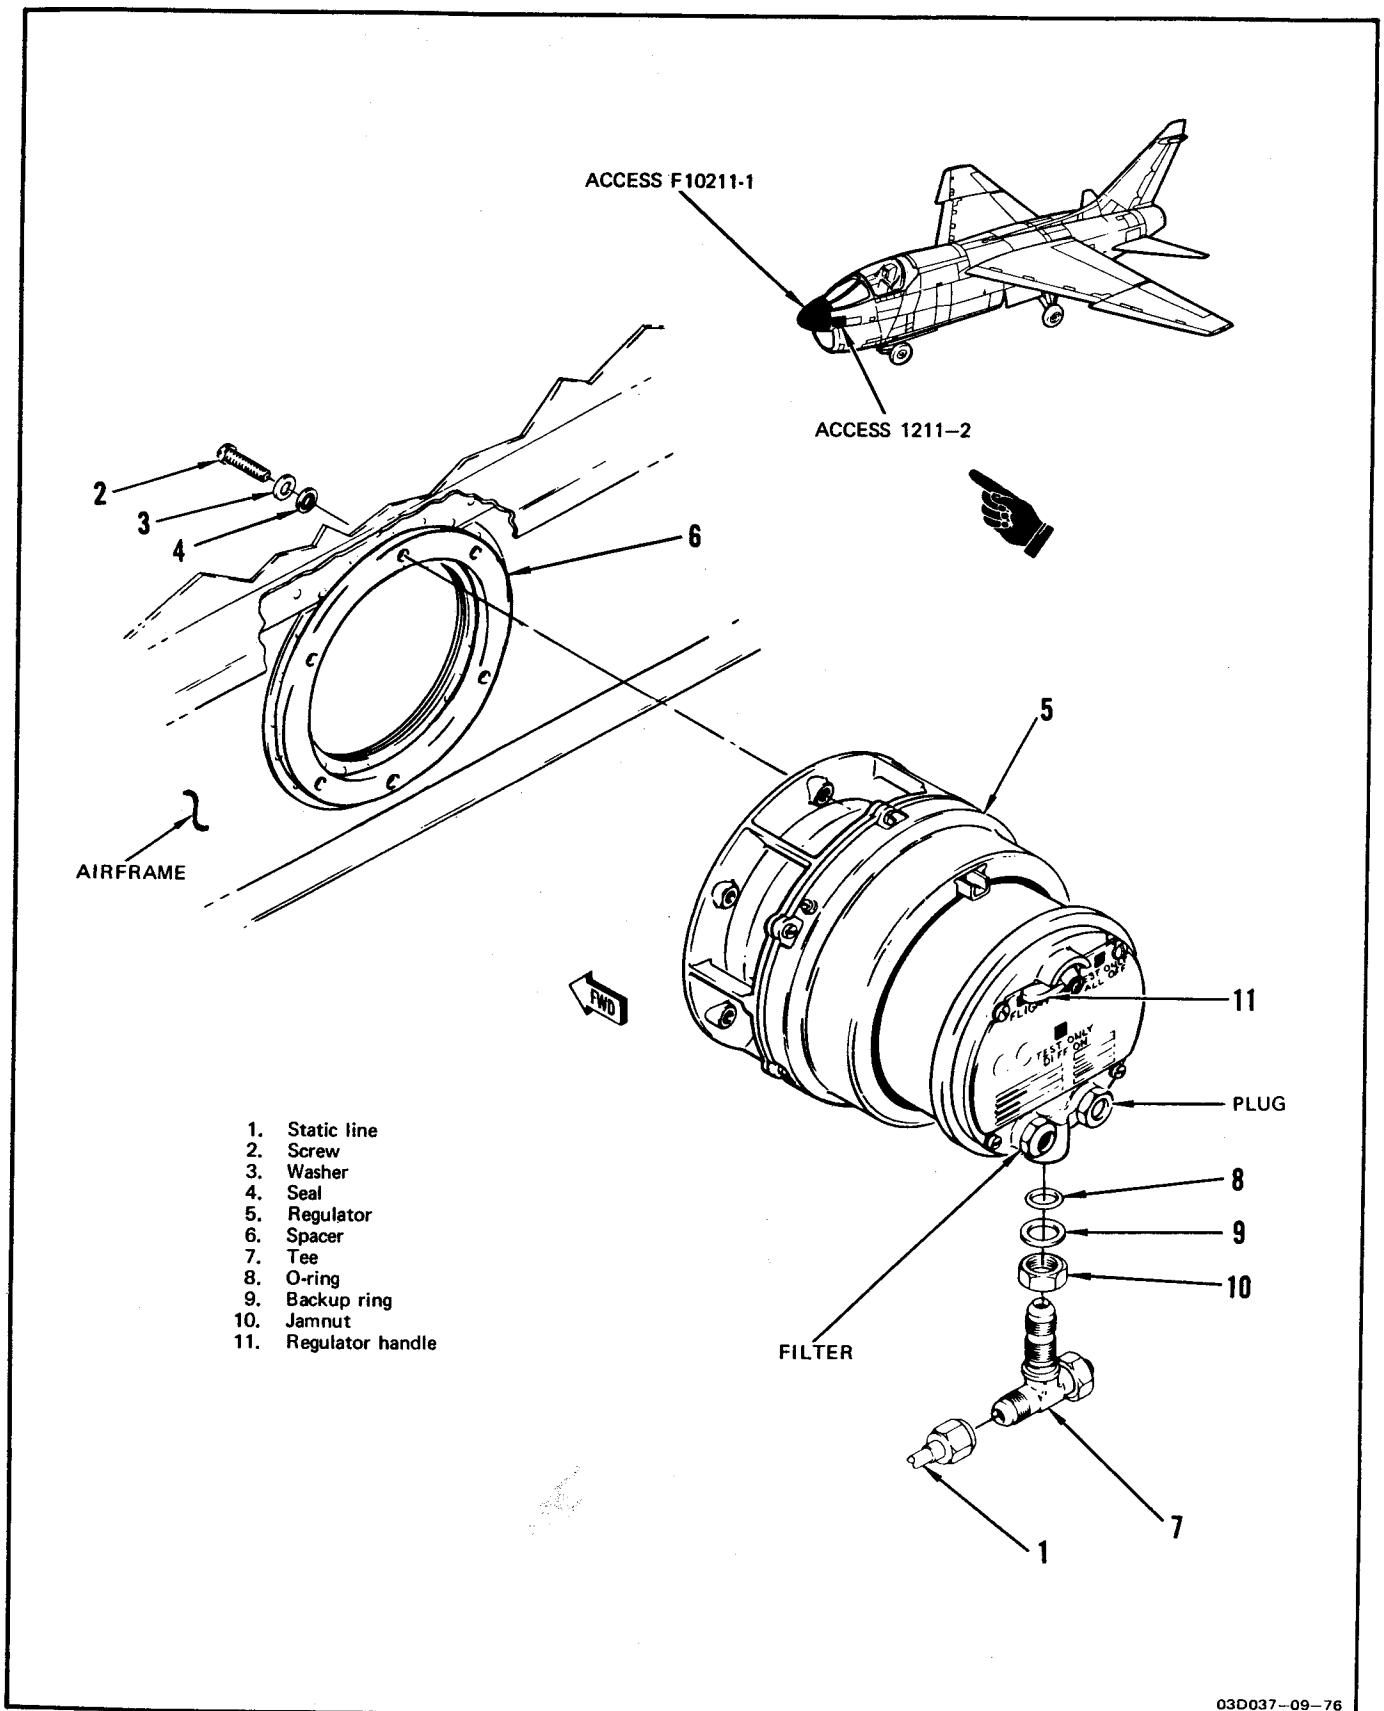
Cockpit Air Pressure Regulator Removal and Installation
